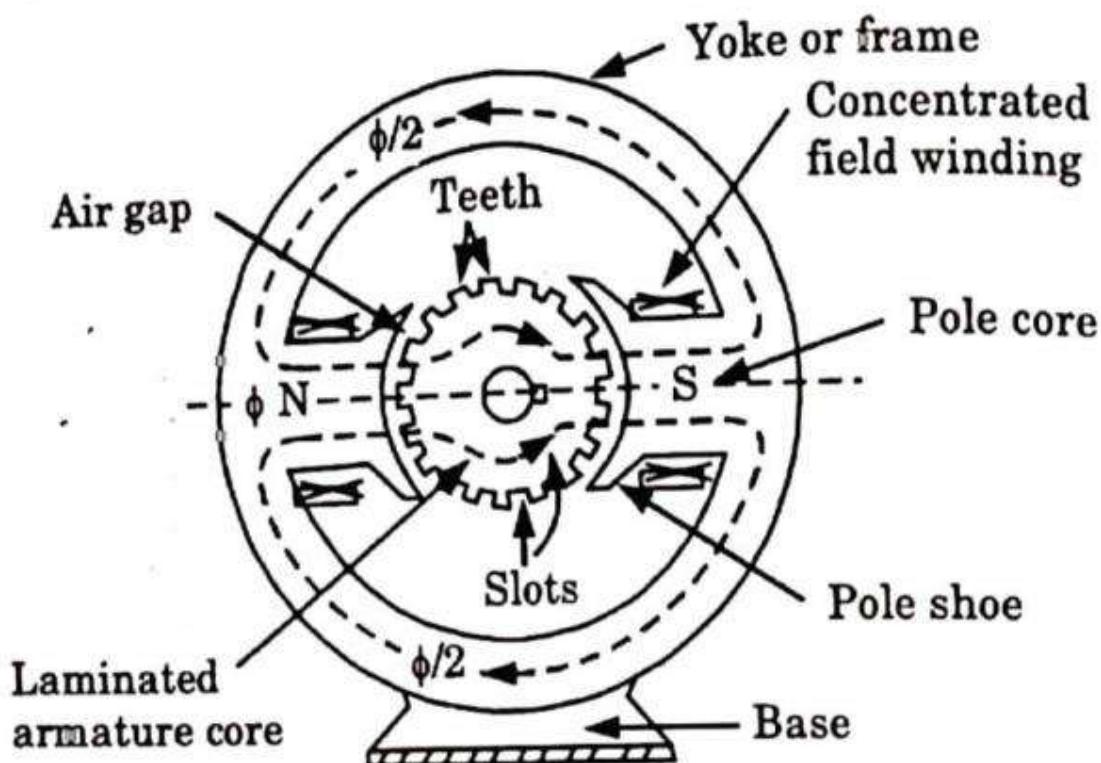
Constructional features of a 2-pole DC machine.
